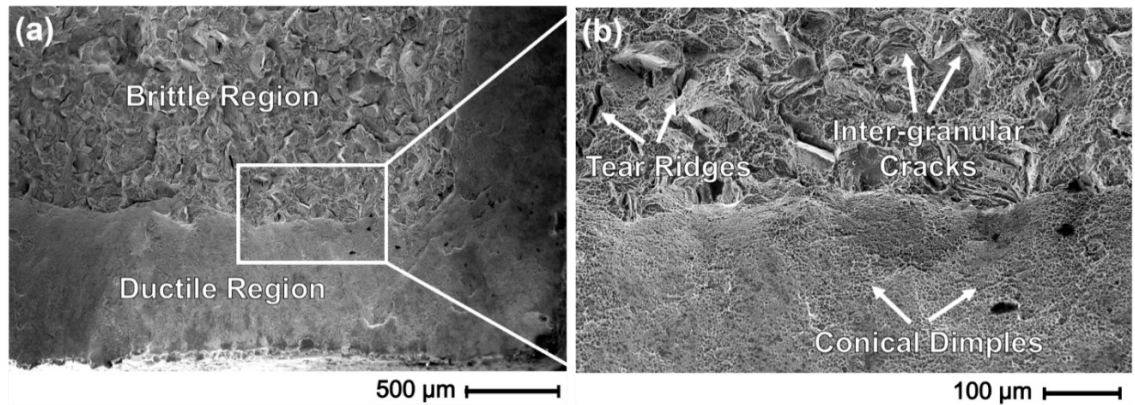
(a) & (b) Multi-scale SEM fractography images taken from T400 sample after uniaxial tensile testing.
